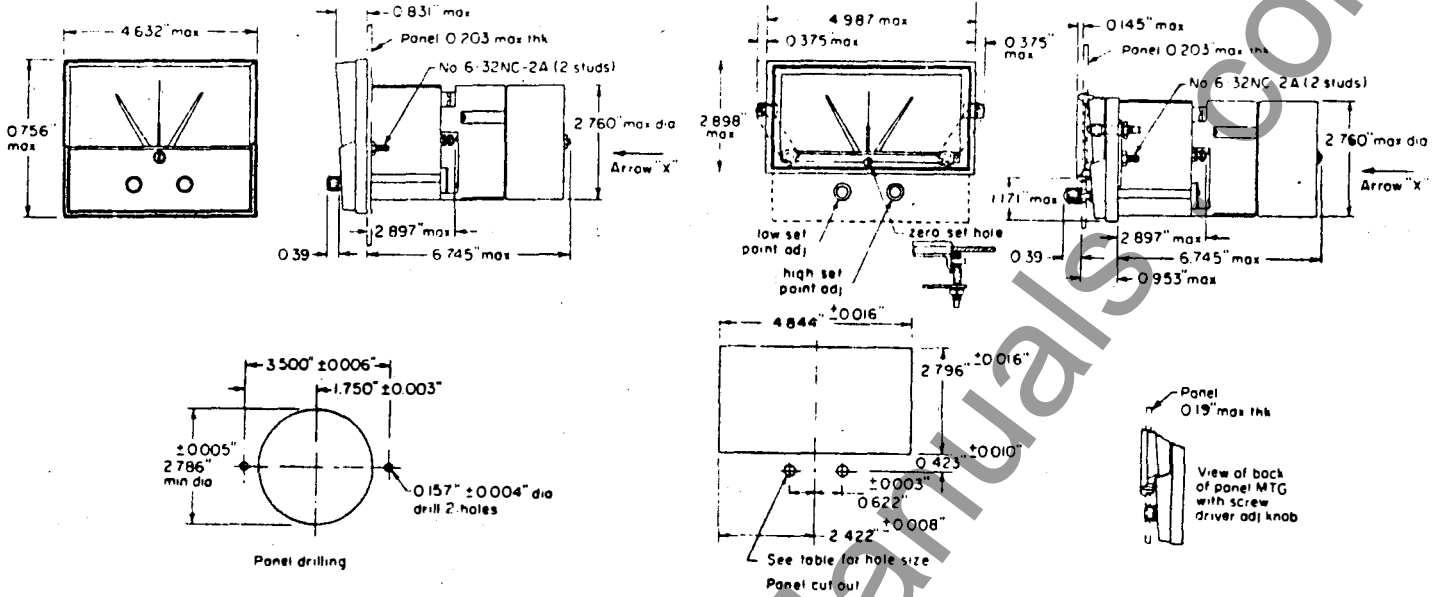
Outline and panel cutout dimensions for Type 196 meter relay, 4 1/2-inch size front mounted.
